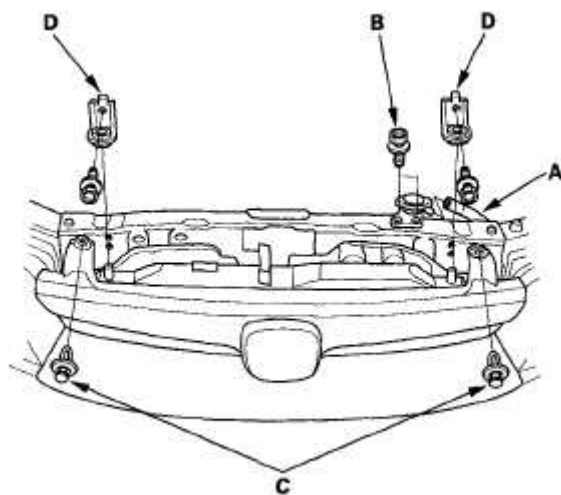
Removing Reservoir Hose, Radiator Cap Base Mounting Bolts, Clips And Radiator Upper Brackets
